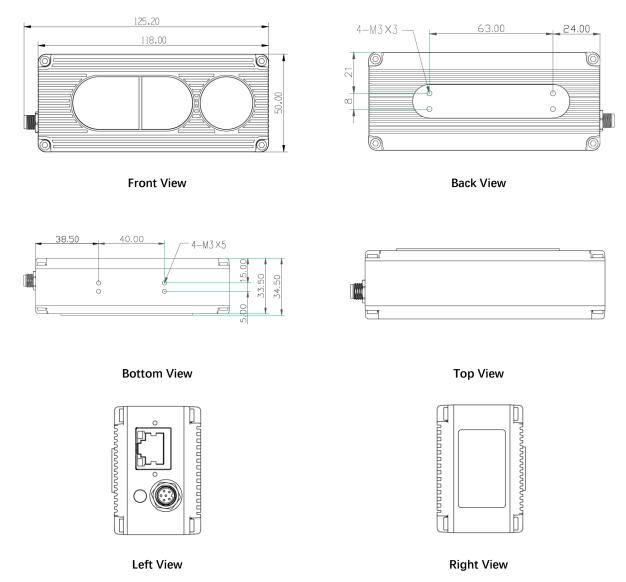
ToF Camera Dimensions (Unit: mm)
